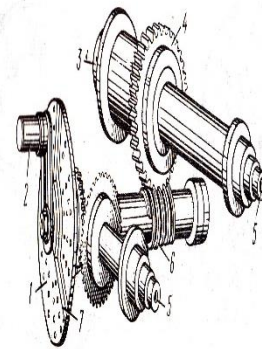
Index-plate universal dividing head: 1 — index plate; 2 — index crank; 3 — spindle; 4 — worm wheel ( $z = 40$ ); 5 — necks to receive pick-off gears; 6 — worm ( $Z = 1$ ); 7 — sector finger
